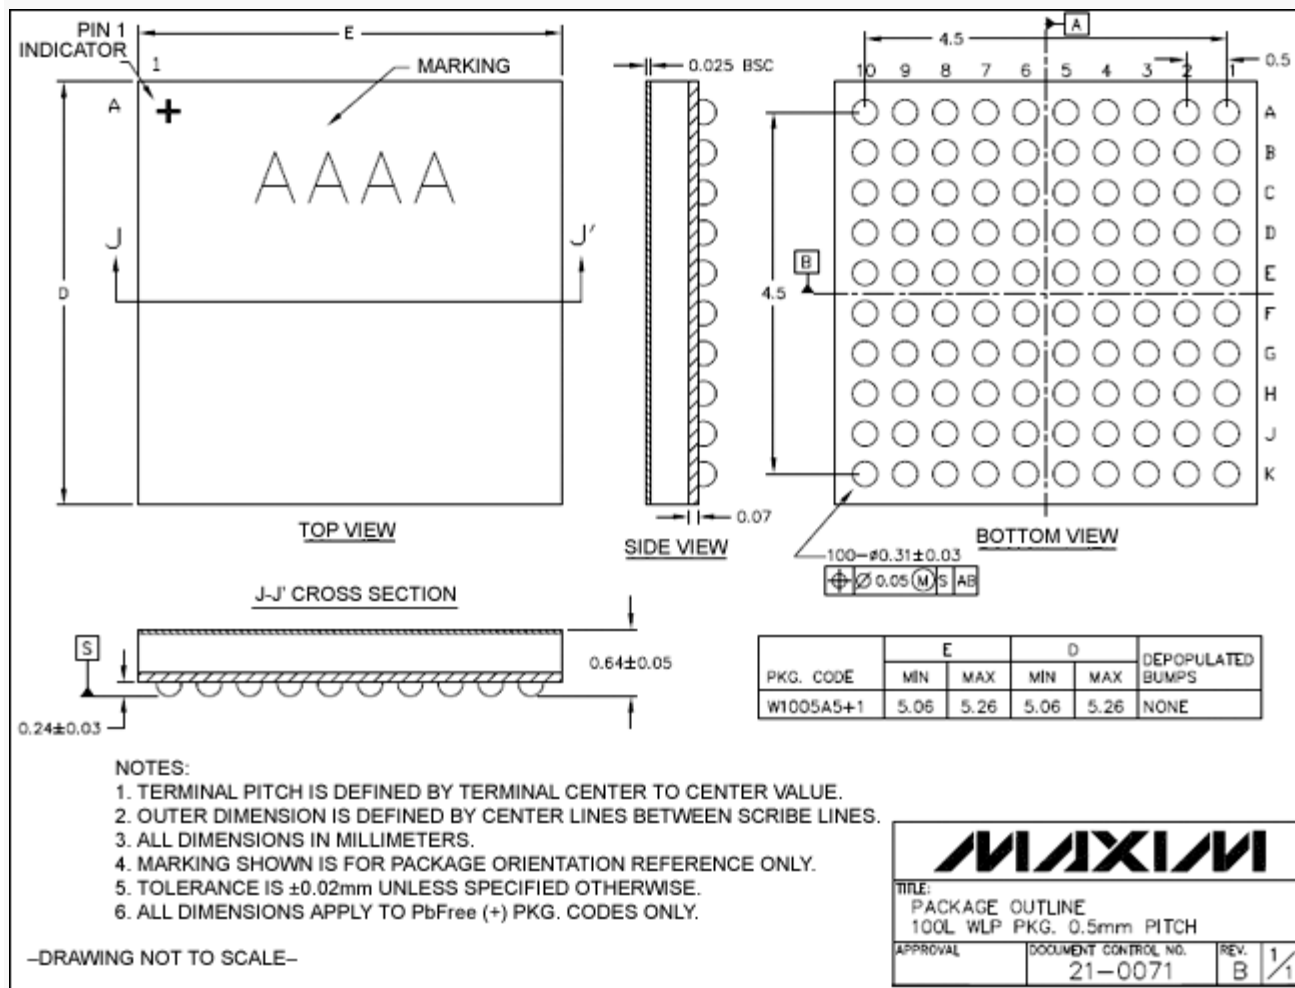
Package outline drawing of a 10 x 10 array WLP.
